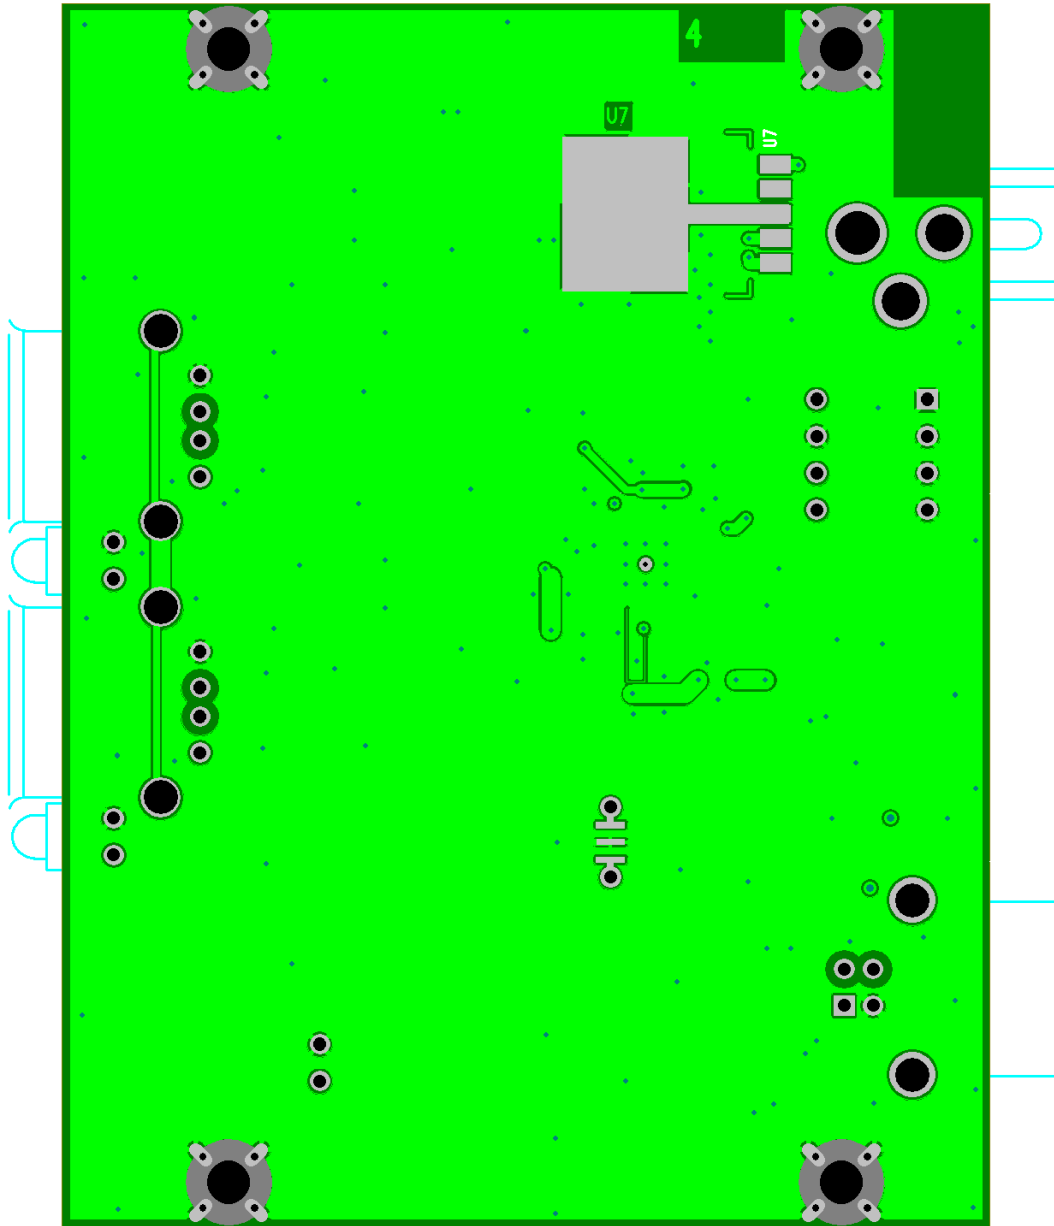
EVB\_USB2412 Bottom Layer - Solder Side
